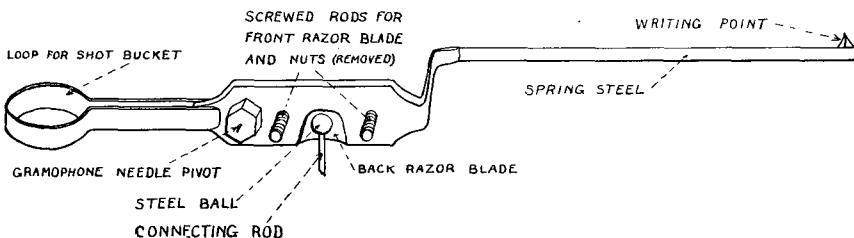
Pen (front razor blade and nuts which hold it removed).
